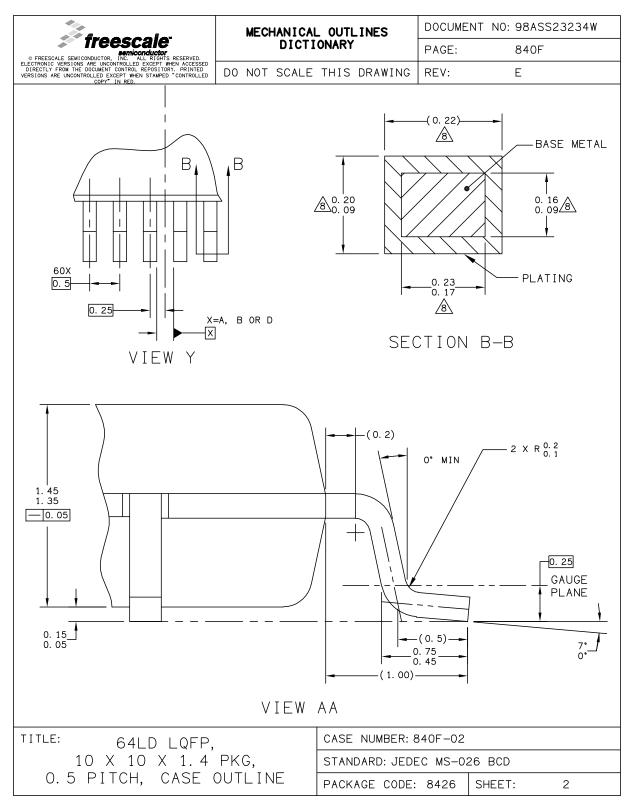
64 LQFP mechanical drawing (part 2 of 3)
